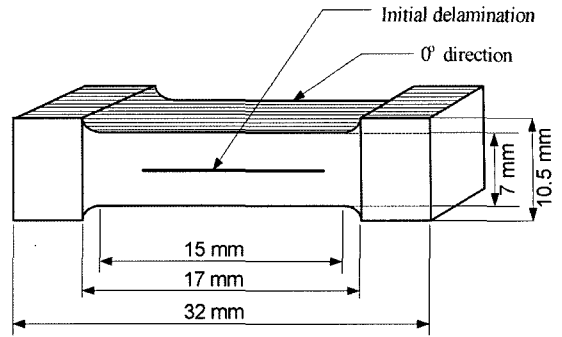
Schematic diagram of compressive dogbone fracture specimen.
